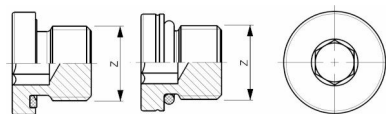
VSTI screw plugs with ED seal (left), with o-ring (right)
